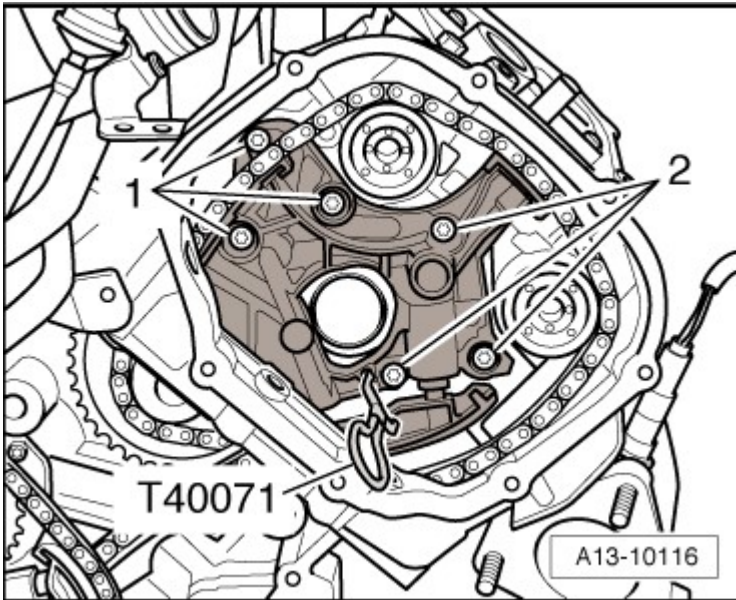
Identifying Bolts For Right Chain Tensioner And Right Camshaft Timing Chain
